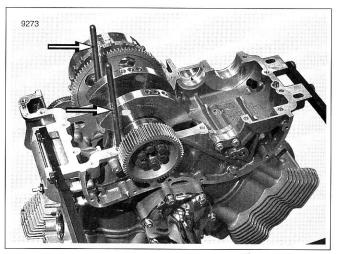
Lower Crankcase Alignment Dowels (HD-45310)
